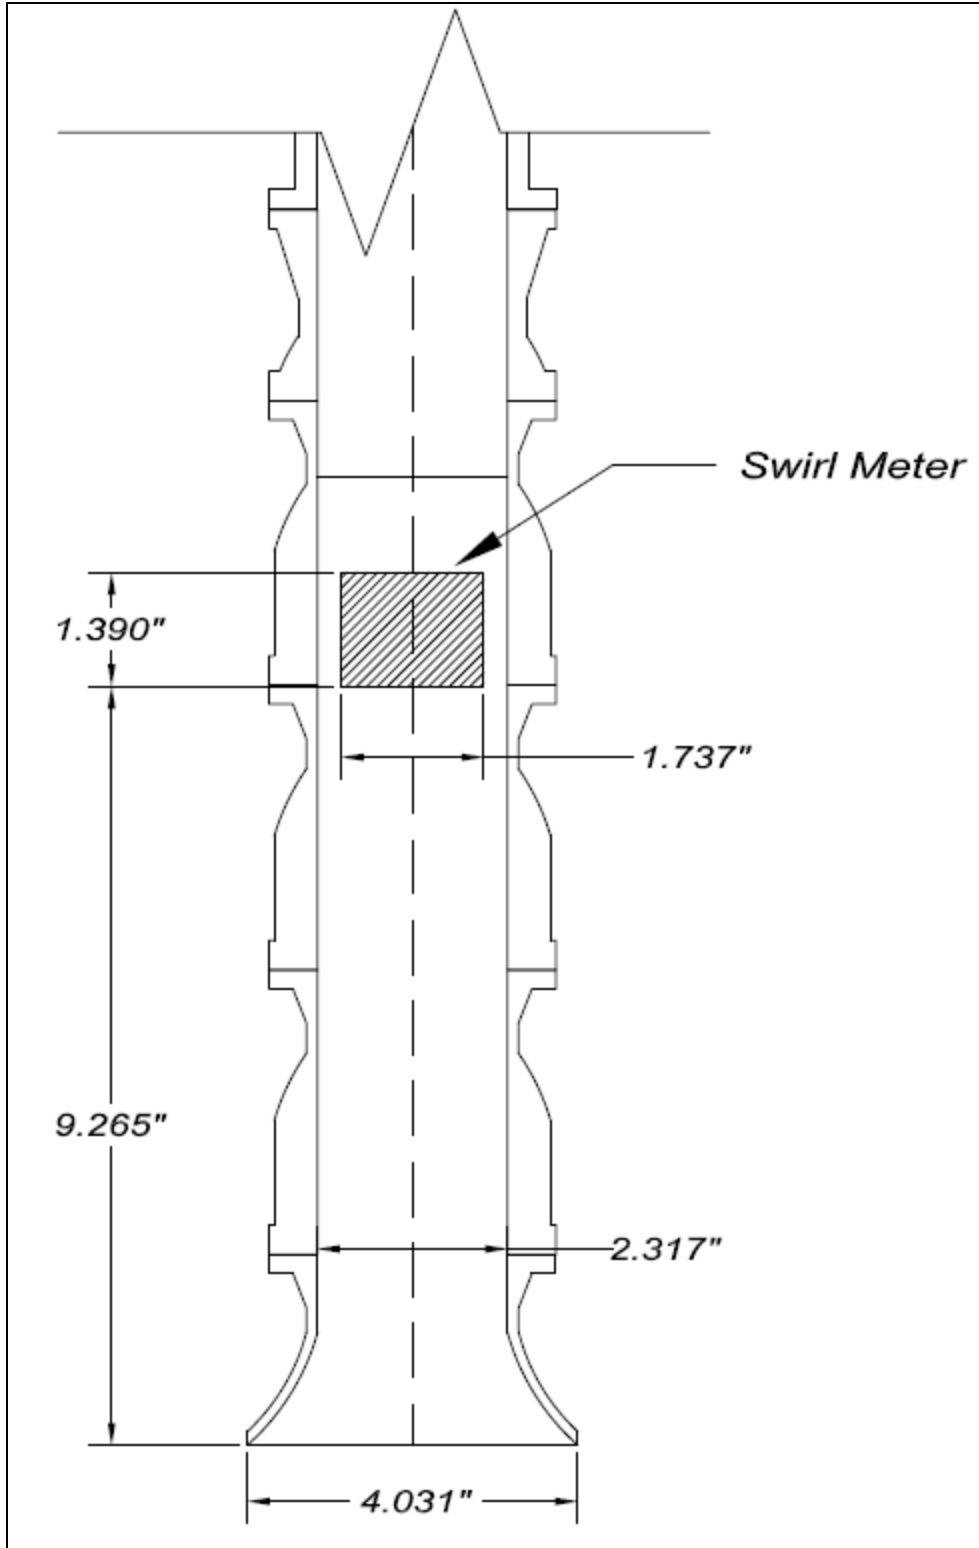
Section-view of the small pump bell geometry and model dimensions used in the physical model.
